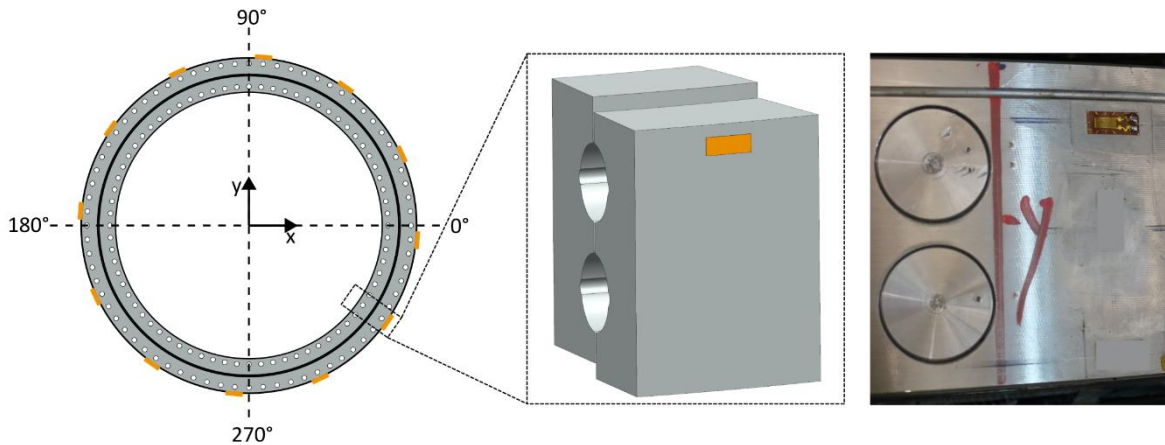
Position of the strain gauges at the outer ring of the lower bearings.
